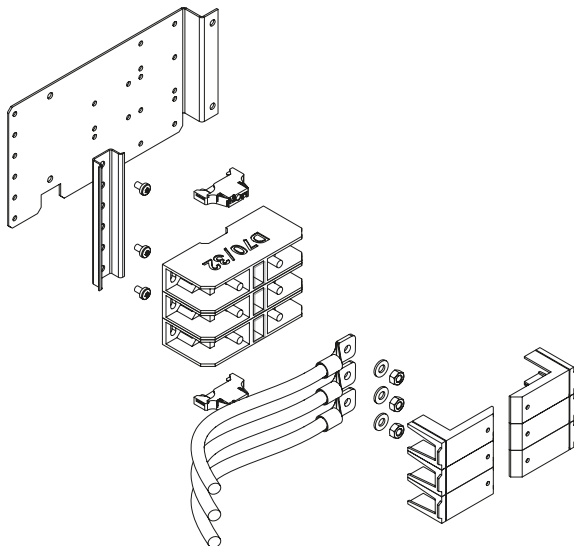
Example of MNS Rear fixed module cable connection with terminal blocks
